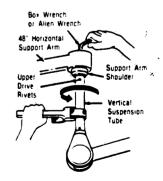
UPPER DRIVE RIVET INSPECTION.
